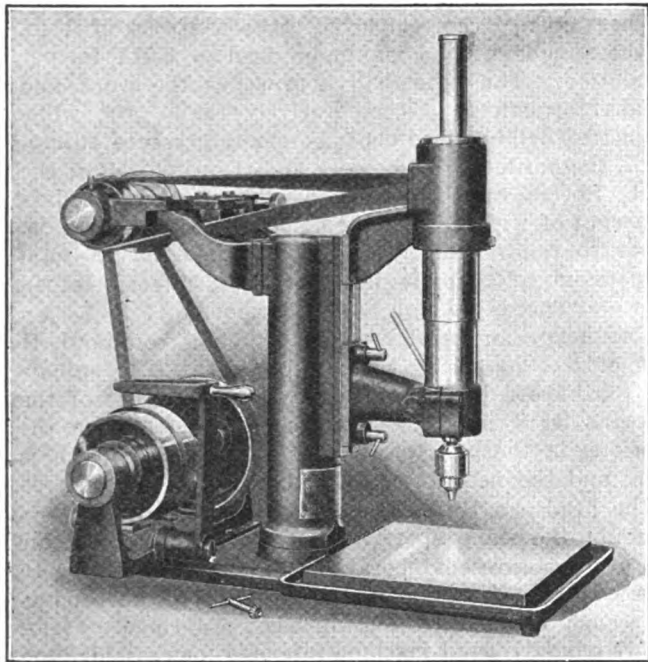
SIGOURNEY NO. 0 BENCH-TYPE HIGH-SPEED DRILLING MACHINE
